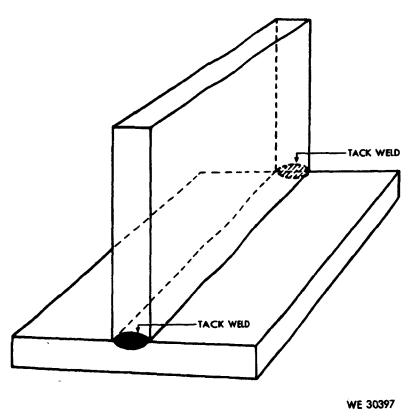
Tack weld to hold tee joint elements in place.
